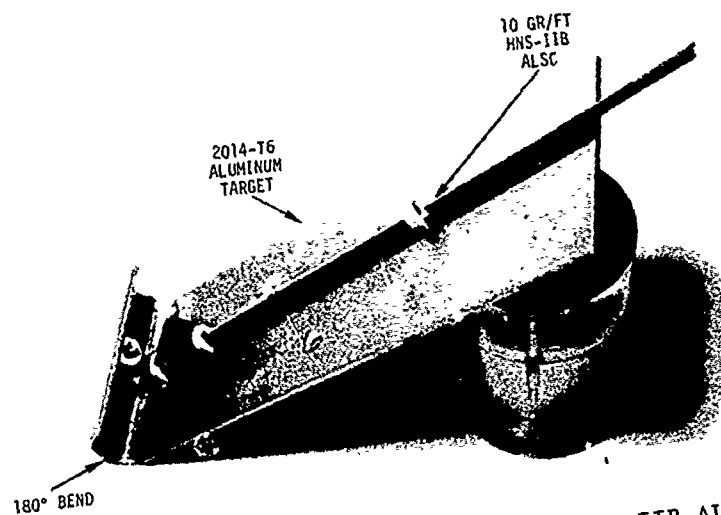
Test Specimen with 10 Gr/Ft HNS-IIB ALSC Formed to 1/8 Inch Bend Radius
